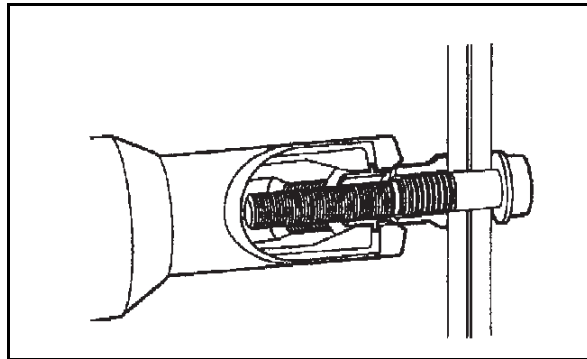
Place Installation Tool Over Fastener Pintail 01_0020
